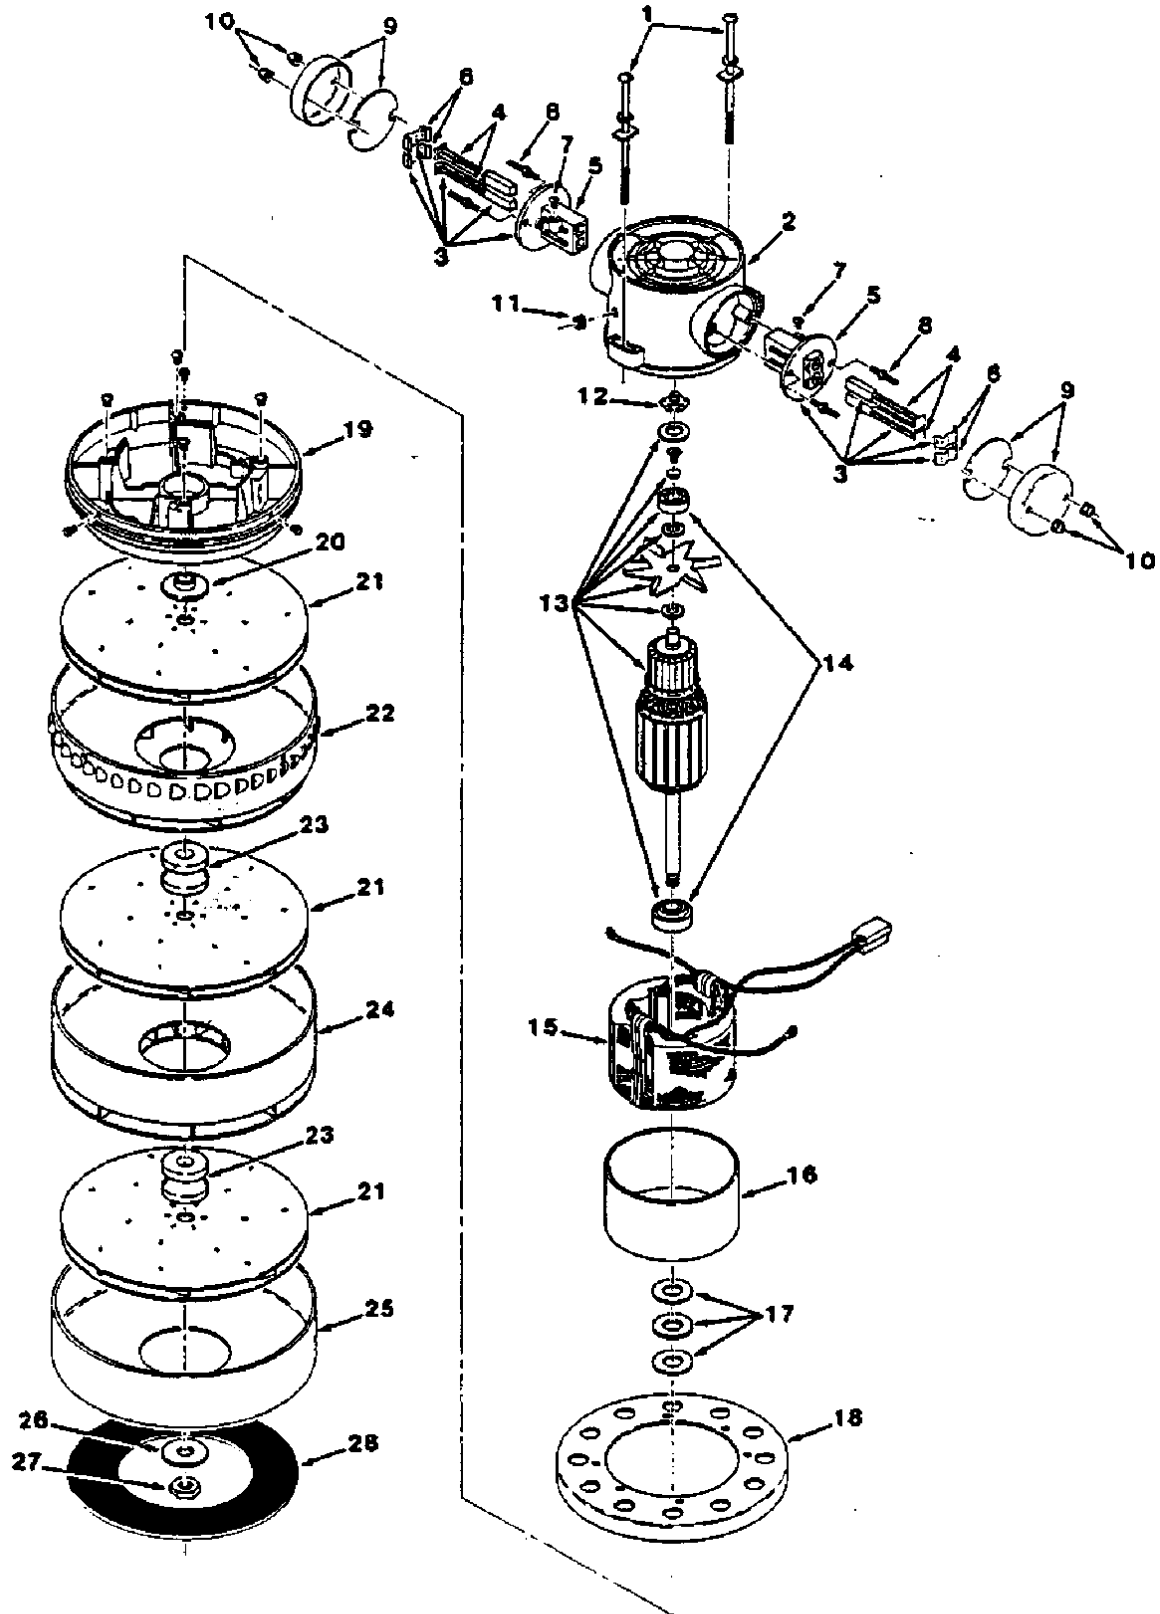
VACUUM FAN MOTOR BREAKDOWN, HEAVY DUTY
